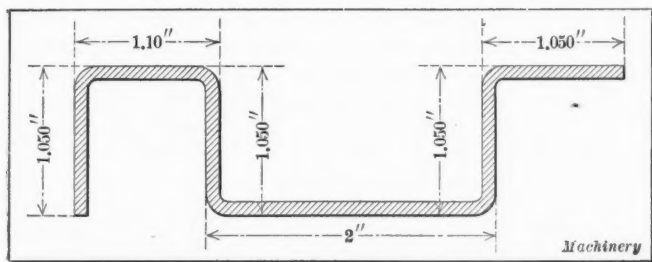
Cross-section of Sheet Metal Bend dimensioned according to Old Method
